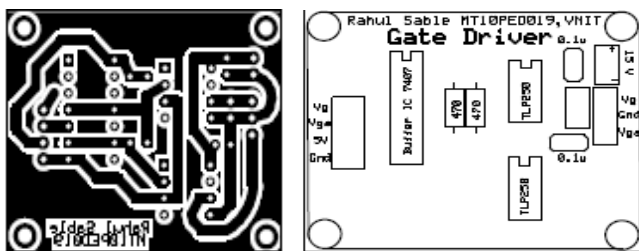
(a) PCB layout of bottom layer Gate driver. Fig.21. (b) PCB layout of silk screen of Gate driver.
